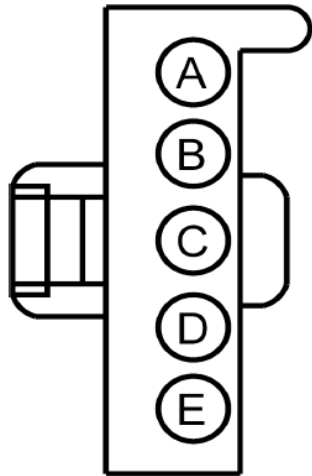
Passenger Air Bag Module Connector End View (C256B)
